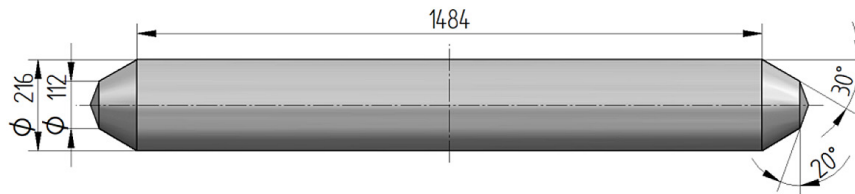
Cylindrical billet used for forming a railcar axle by CWR
